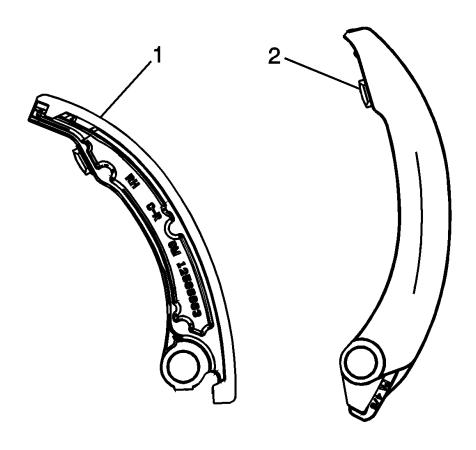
View Of Left Secondary Camshaft Drive Chain Shoe Courtesy of GENERAL MOTORS COMPANY
